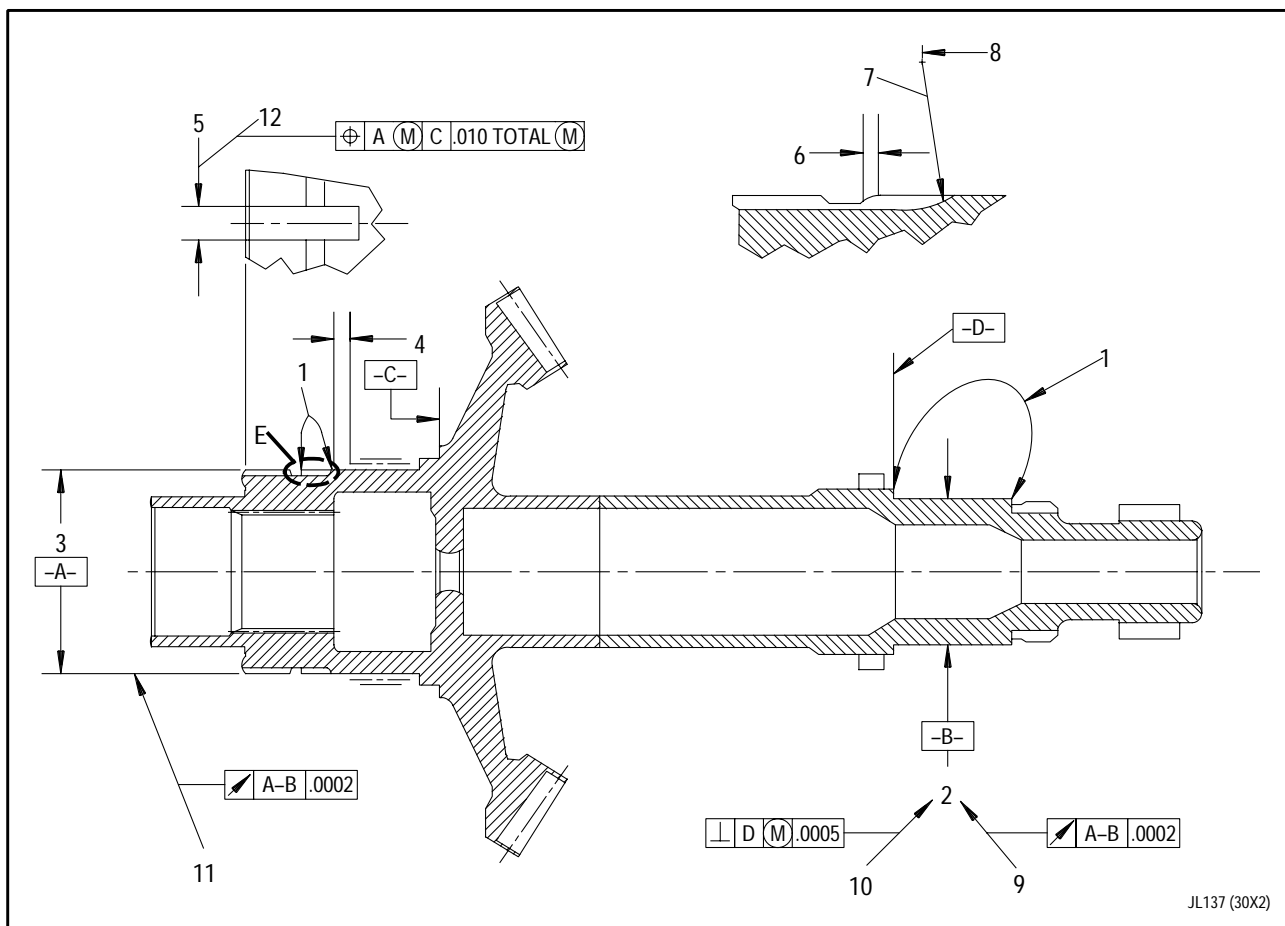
Gearbox Drive Spur Bevel Gearshaft - Plating Repair
